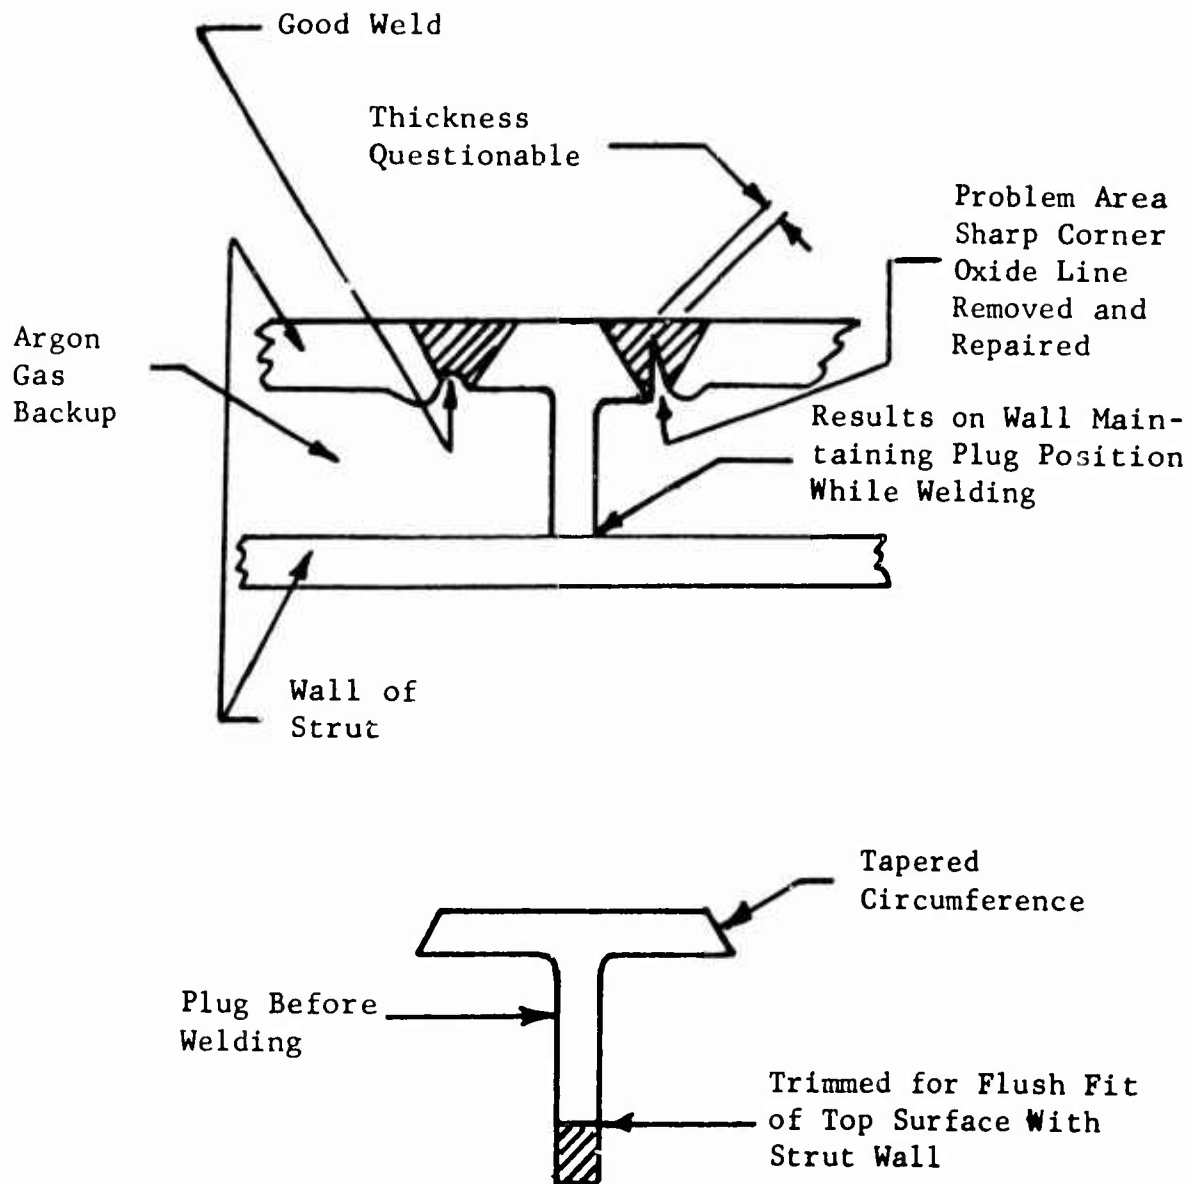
Core Hole Closure of the A356 Aluminum Strut Wall Showing Plug and Problem Requiring Repair.
